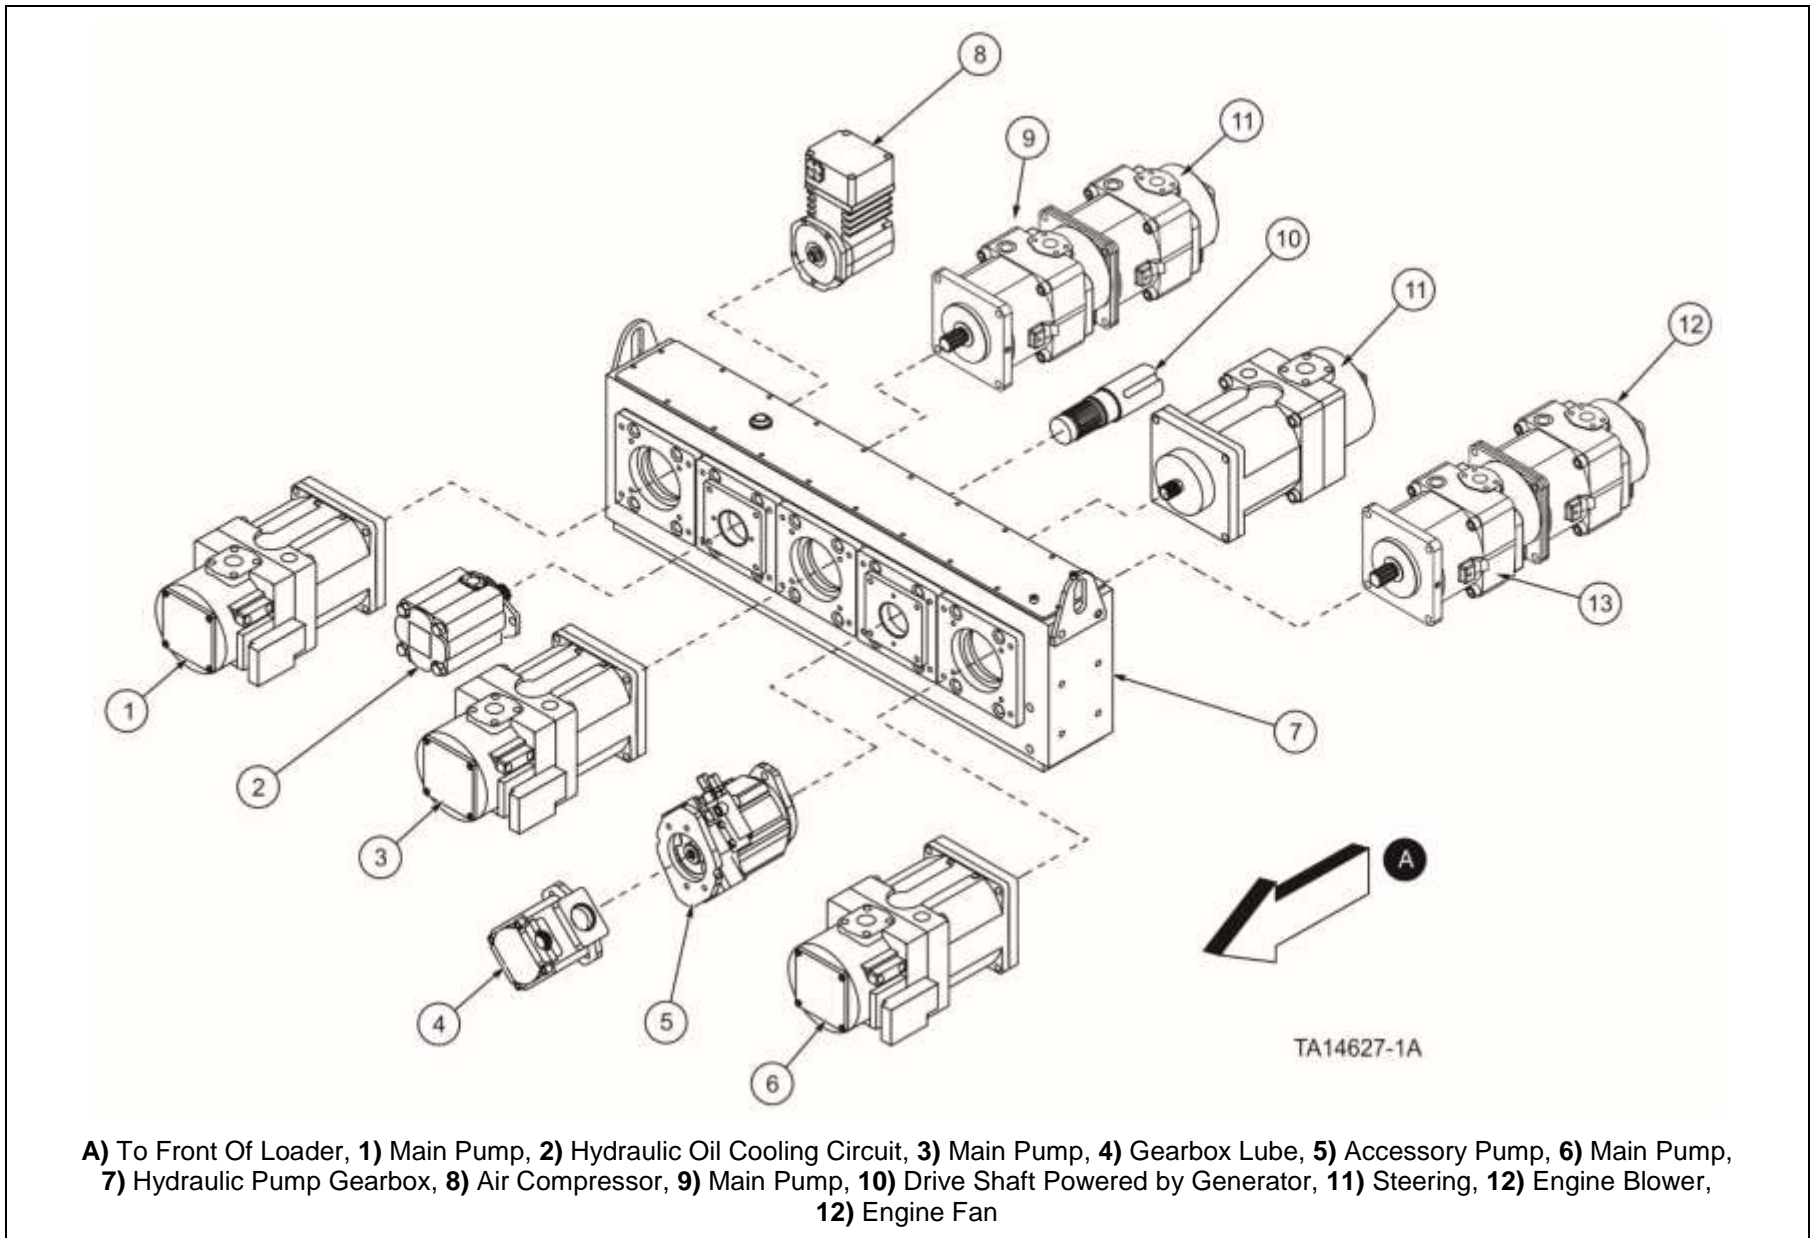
L-2350 Hydraulic pump arrangement for 11 blade engine fan (typical pump types are illustrated)
